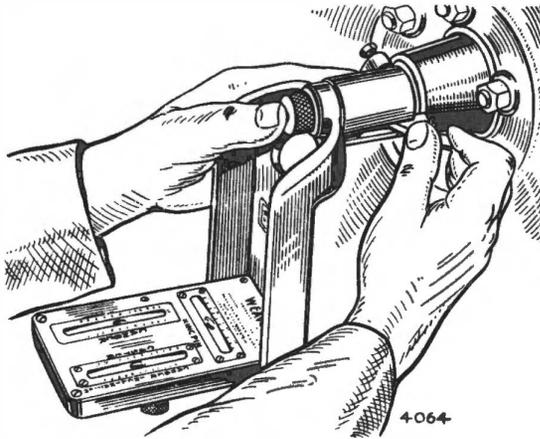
Clamping adaptor sleeve and gauge to spindle
